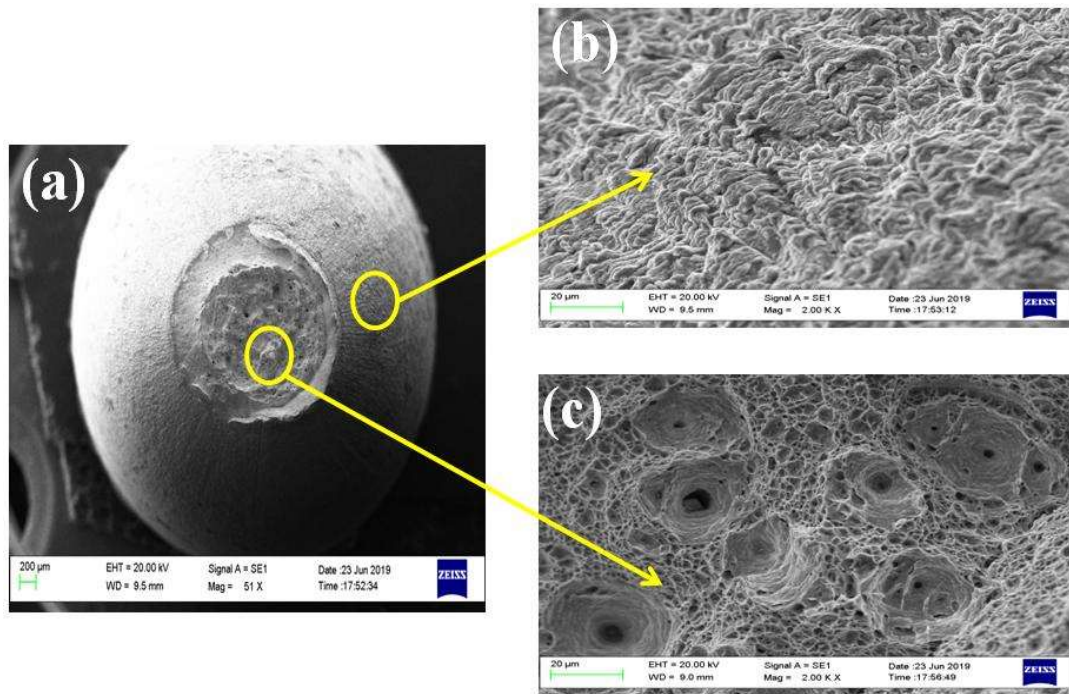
Fracture surface of modified 9 Cr-1Mo steel ratcheted at 600°C: (a) full view of the fracture surface (b) magnified view of the annular region, below the fracture surface, showing striations like features and (c) magnified view of the central region of the fracture surface showing dimples.
